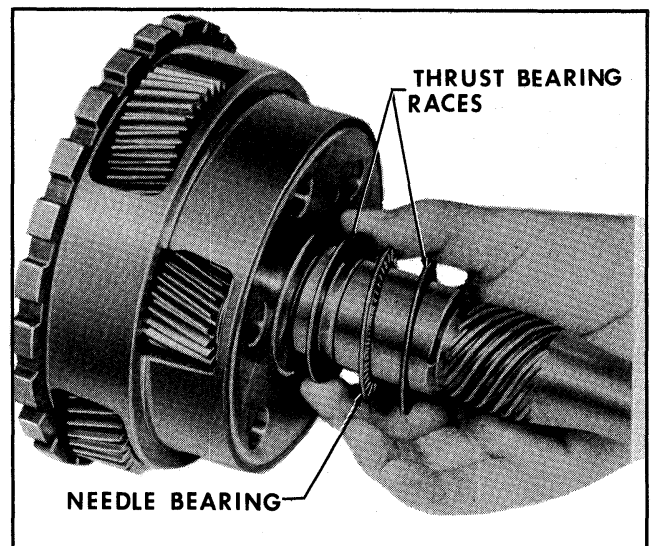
B-125 Installing Planet Carrier Thrust Bearing and Races
